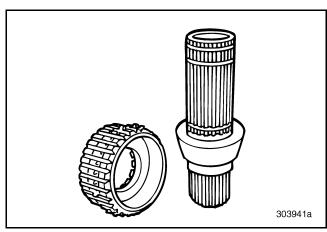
Installing Lo-Range Gear Hub (T313L/T318L Shown)
